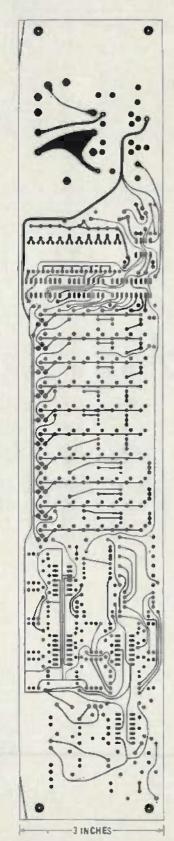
THE SOLDER SIDE of the analyzer circuit board is shown here half-sized.
